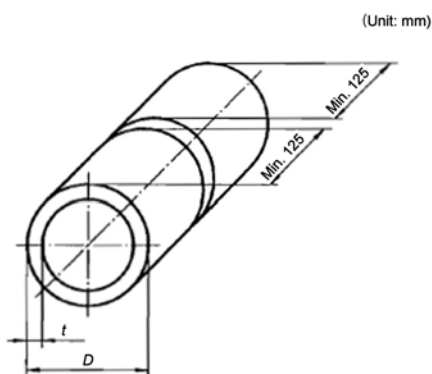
Dimensions and types of test assembly for pipe butt welds
